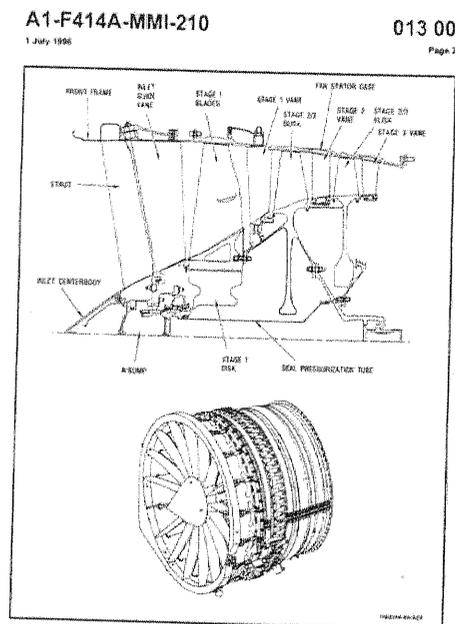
Fan Stator Assembly Containing Vanes/Blades
